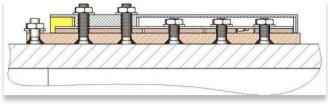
Cross section of T sensor – flat surface pipe fixing solution, courtesy of CEA Grenoble
